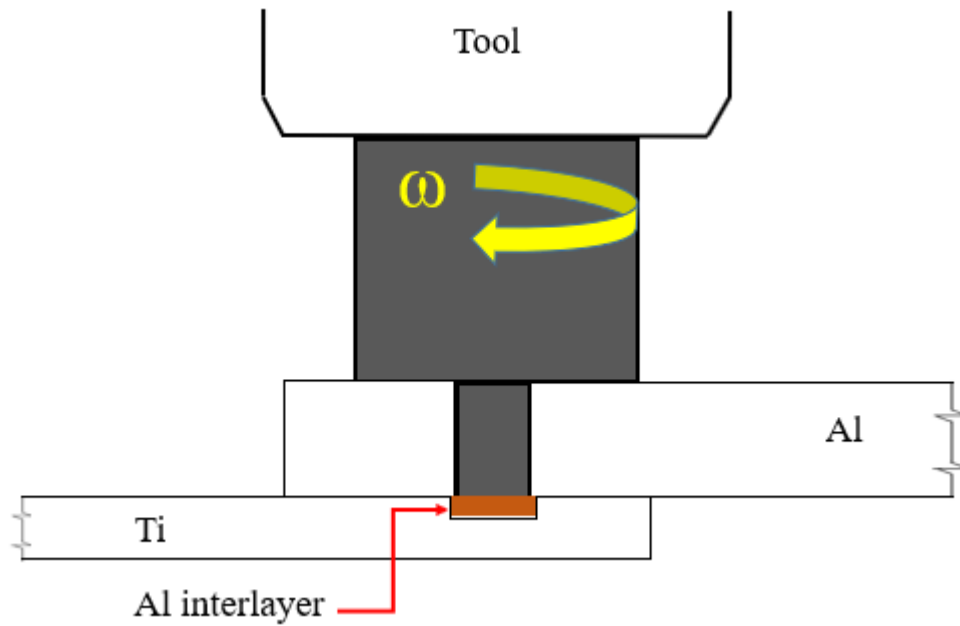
Schematic illustration of cross-section of Al interlayer insert while tool pin being plunged in without touching the bottom Ti plate.
